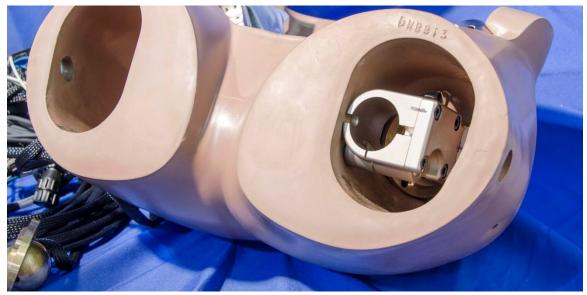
Insert femur ball joint assembly into pelvic flesh
